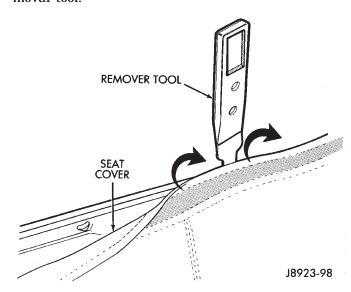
Seat Cushion Cover Retaining Clip Removal
